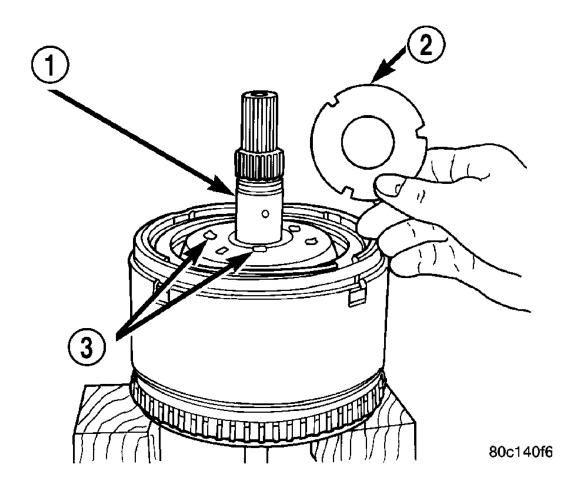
Installing #4 Thrust Plate Using Petrolatum To Hold Into Position Courtesy of CHRYSLER LLC
